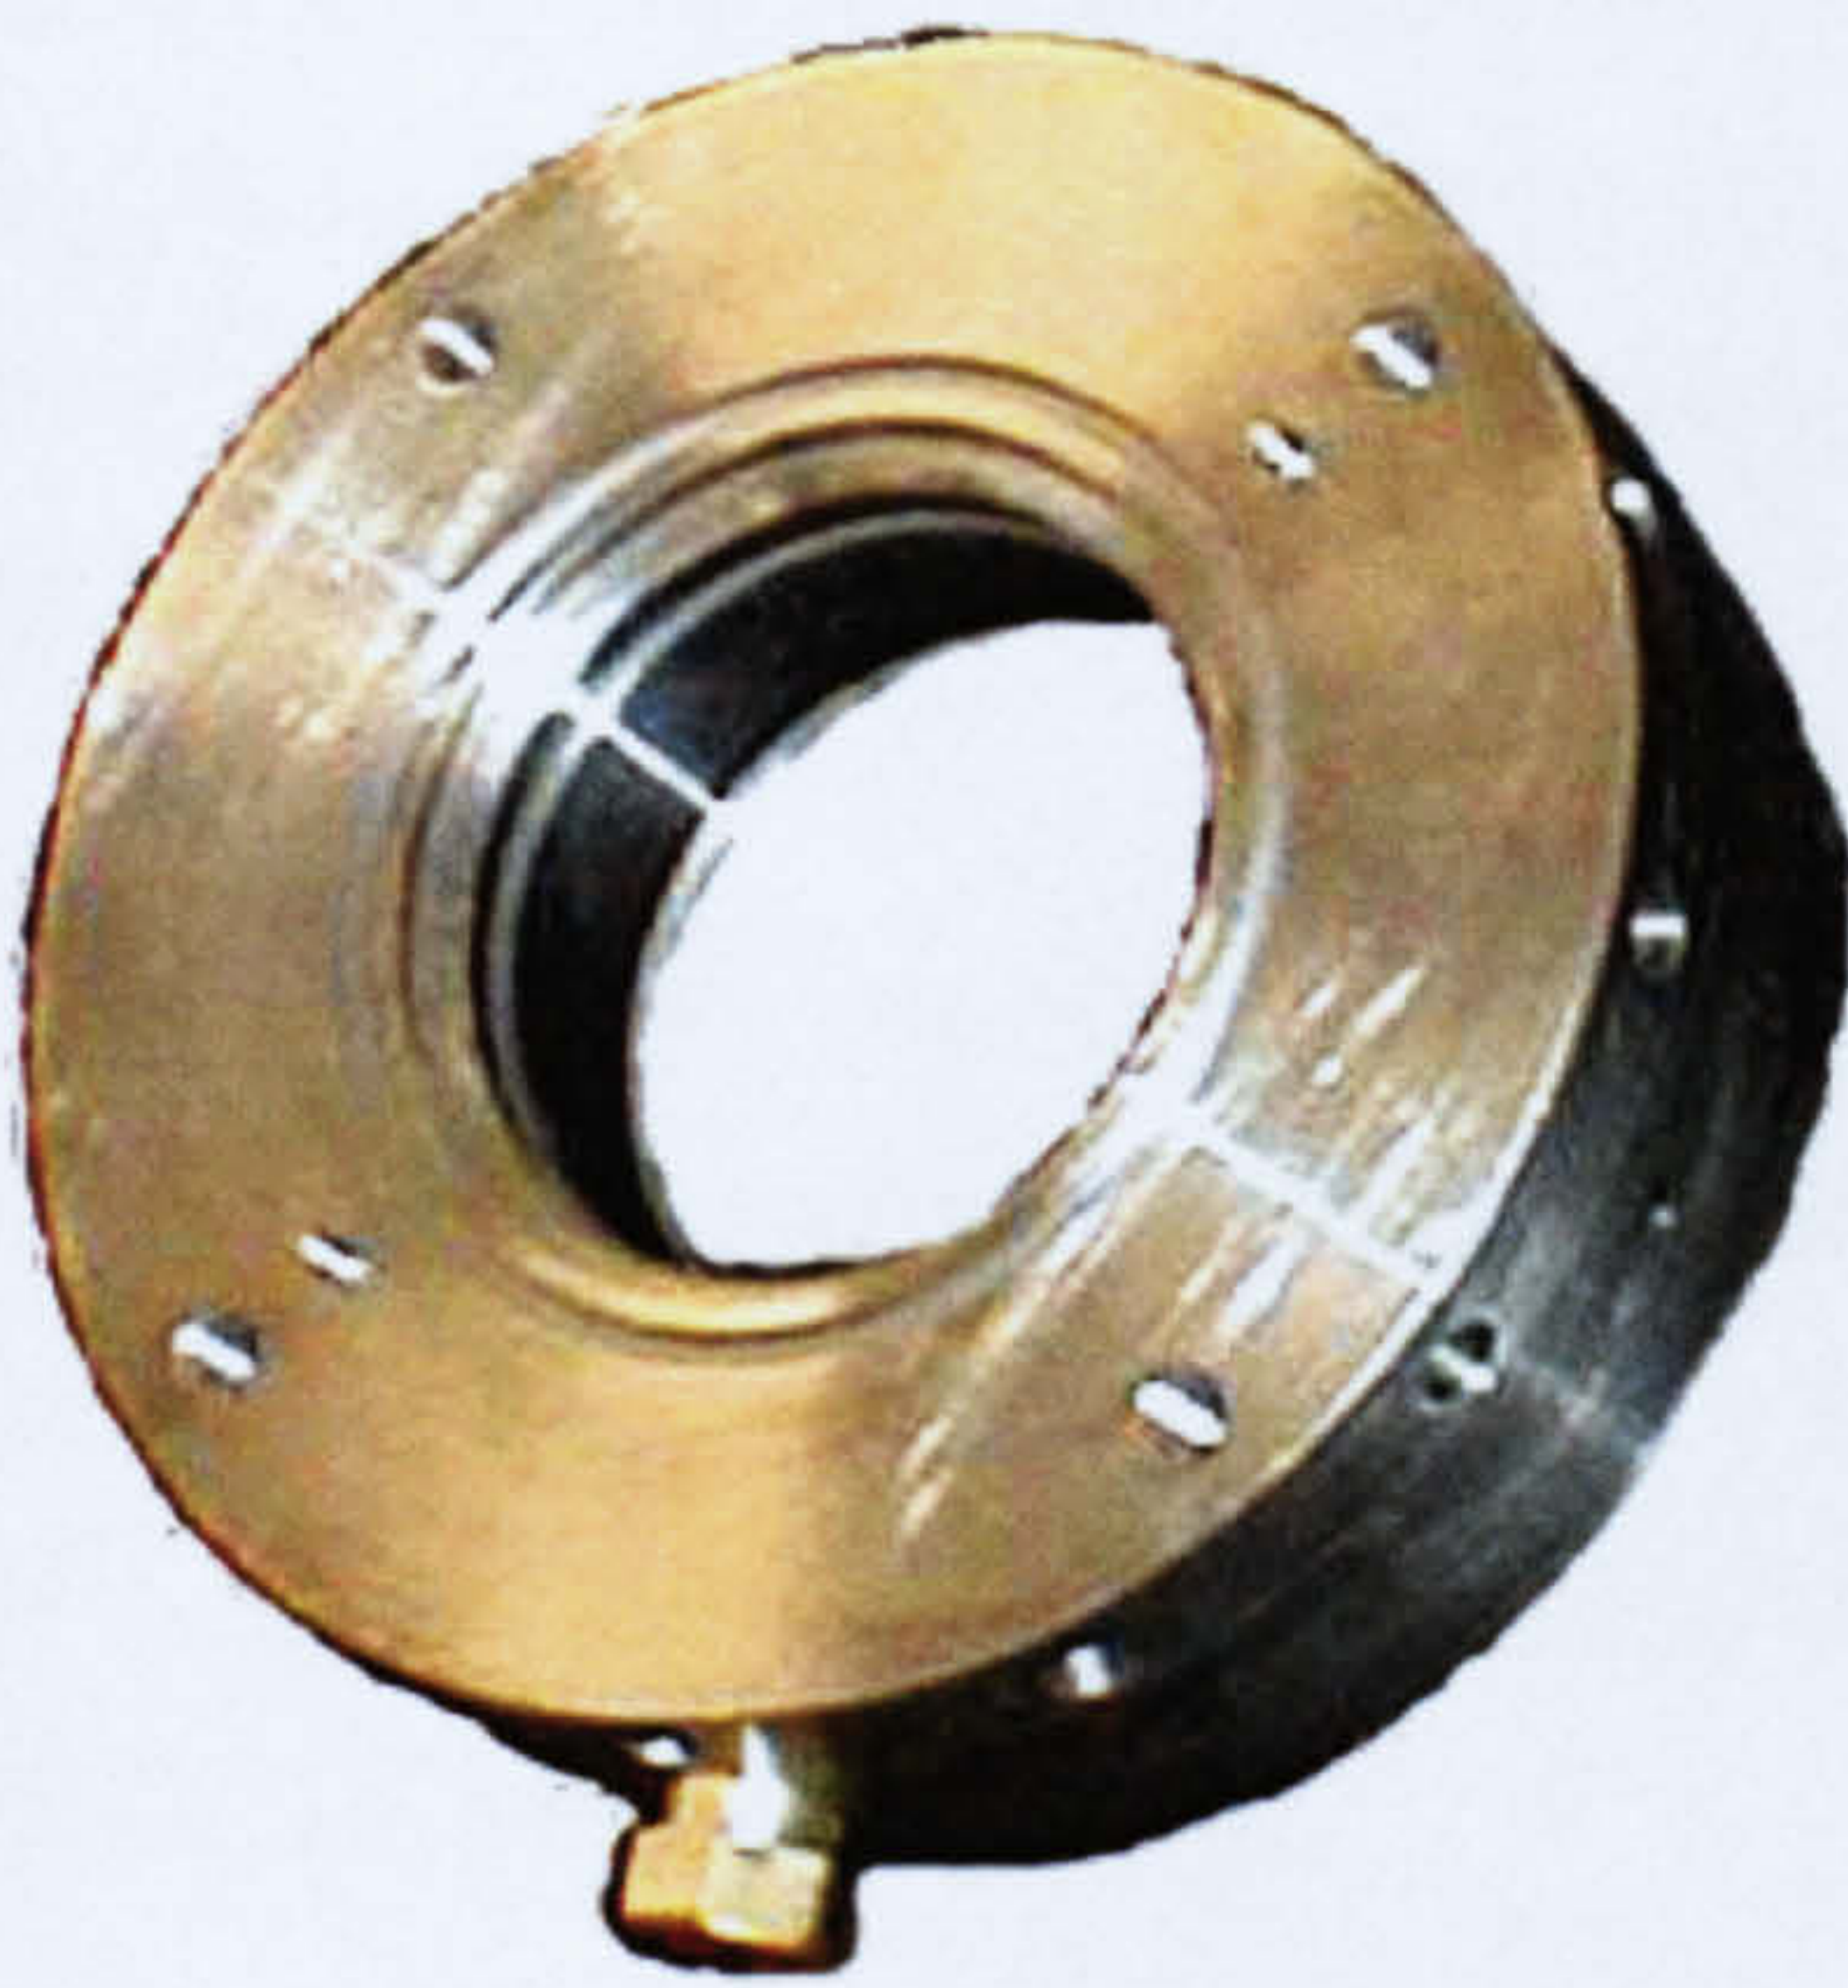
Cylinder-piston assembly for LUPOE2 engine.
